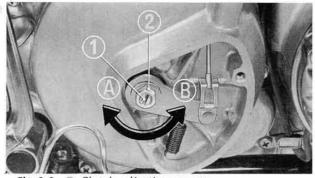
(1) Clutch adjusting screw 2 Adjusting screw lock nut
